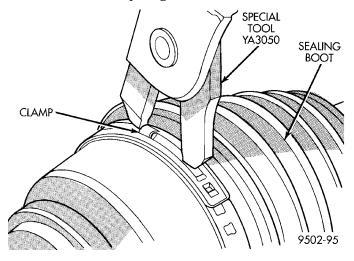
Clamping Tool Installed on Sealing Boot Clamp
